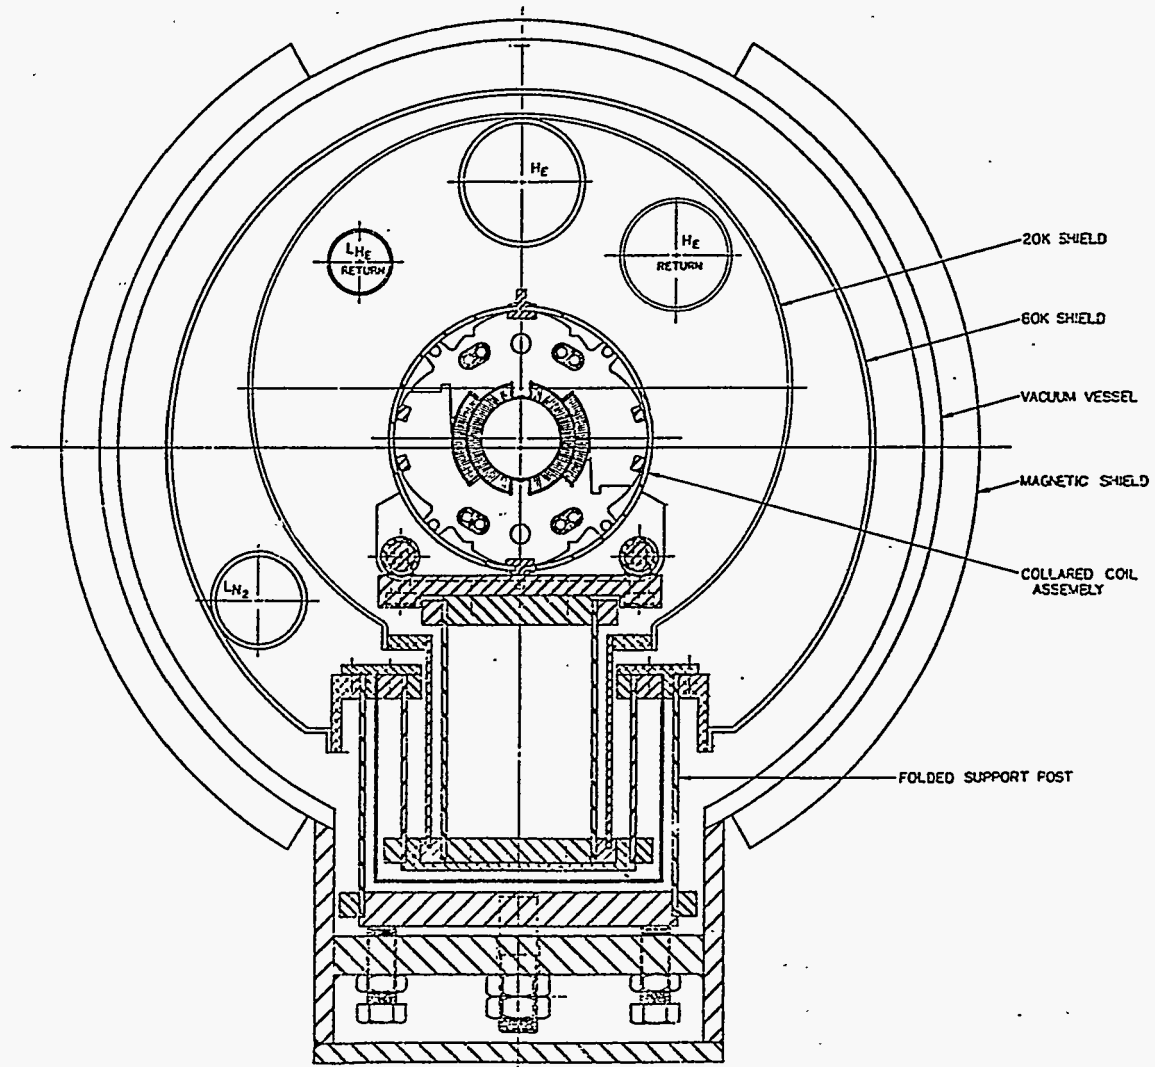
Modified Design B magnet assembly with folded post arrangement.
